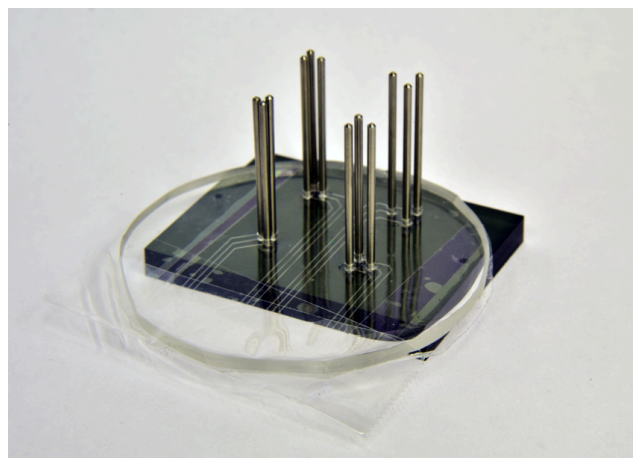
Pins for dip molding 2DOF actuators pressed through the elastomer with microfluidic components, and into an alignment fixture.
